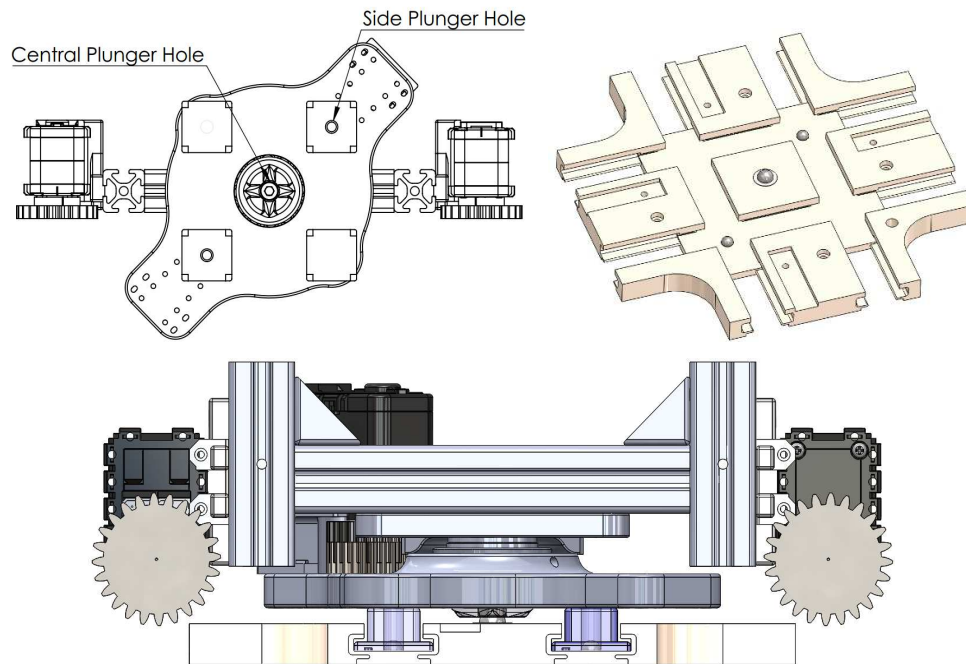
Drawing and 3D model of Railbot, showing the fixture mechanism used for precise positioning of the agent in the center of the junction.
